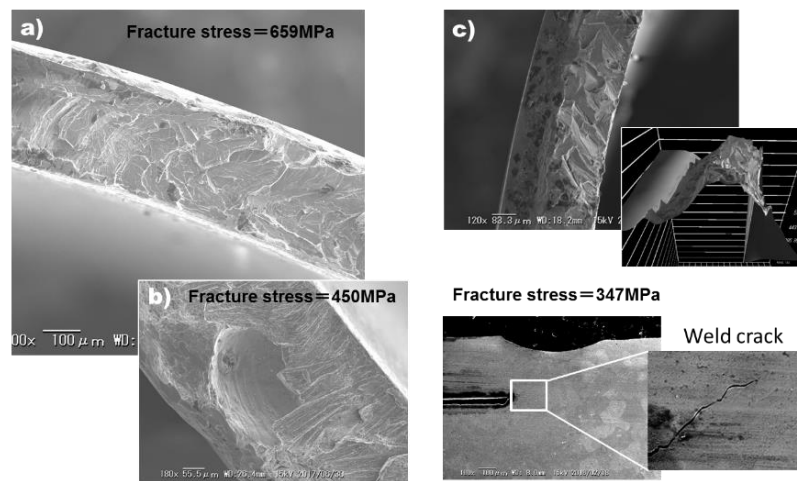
Fracture mode of the tensile tested specimens: a) a mixed mode of ductile and quasi cleavage mode of which the fracture stress was the largest; 659 MPa, b) a large pore was observed on the fracture surface: fracture stress was 450 MPa, c) The fracture stress was smallest (347 MPa) among the tested specimens. The bonded part got thin.
